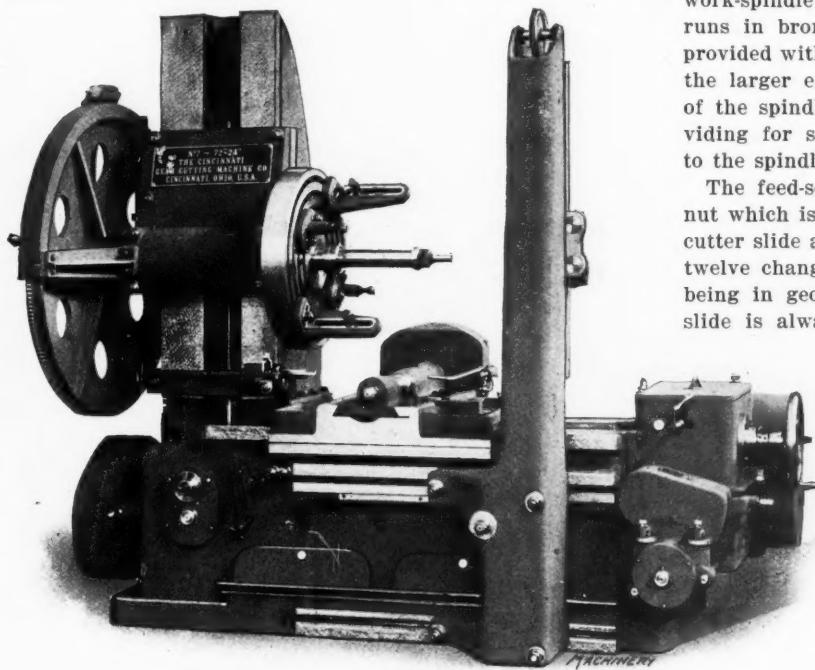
Front View of Cincinnati Automatic Spur Gear Cutter
